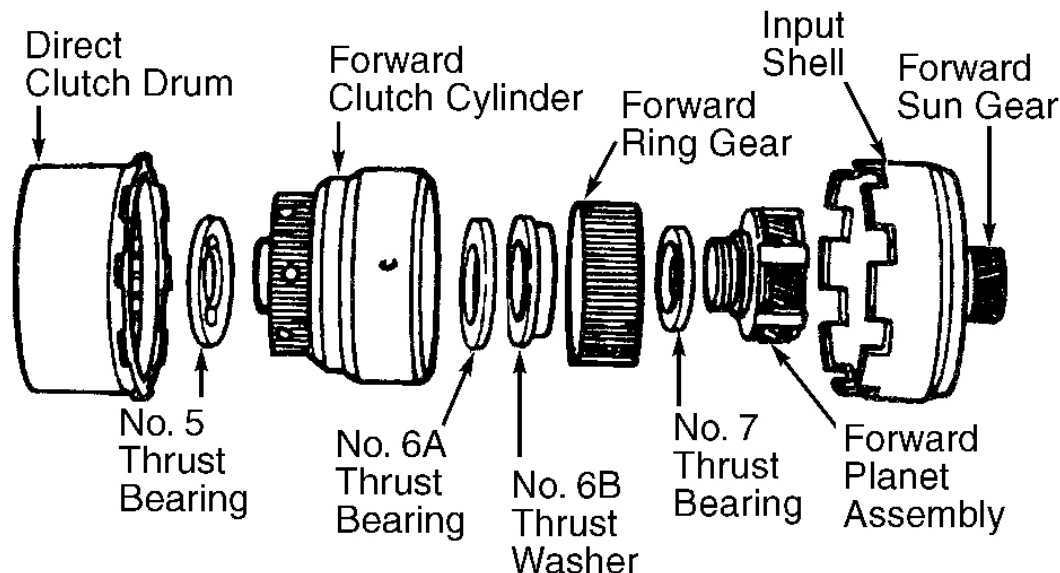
Exploded View Of Forward Clutch Assembly
